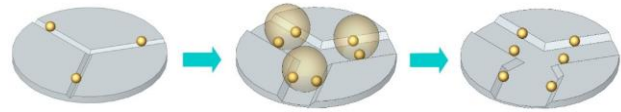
Expand 3-Groove type kinematic mounting from 3 balls to 6 balls
